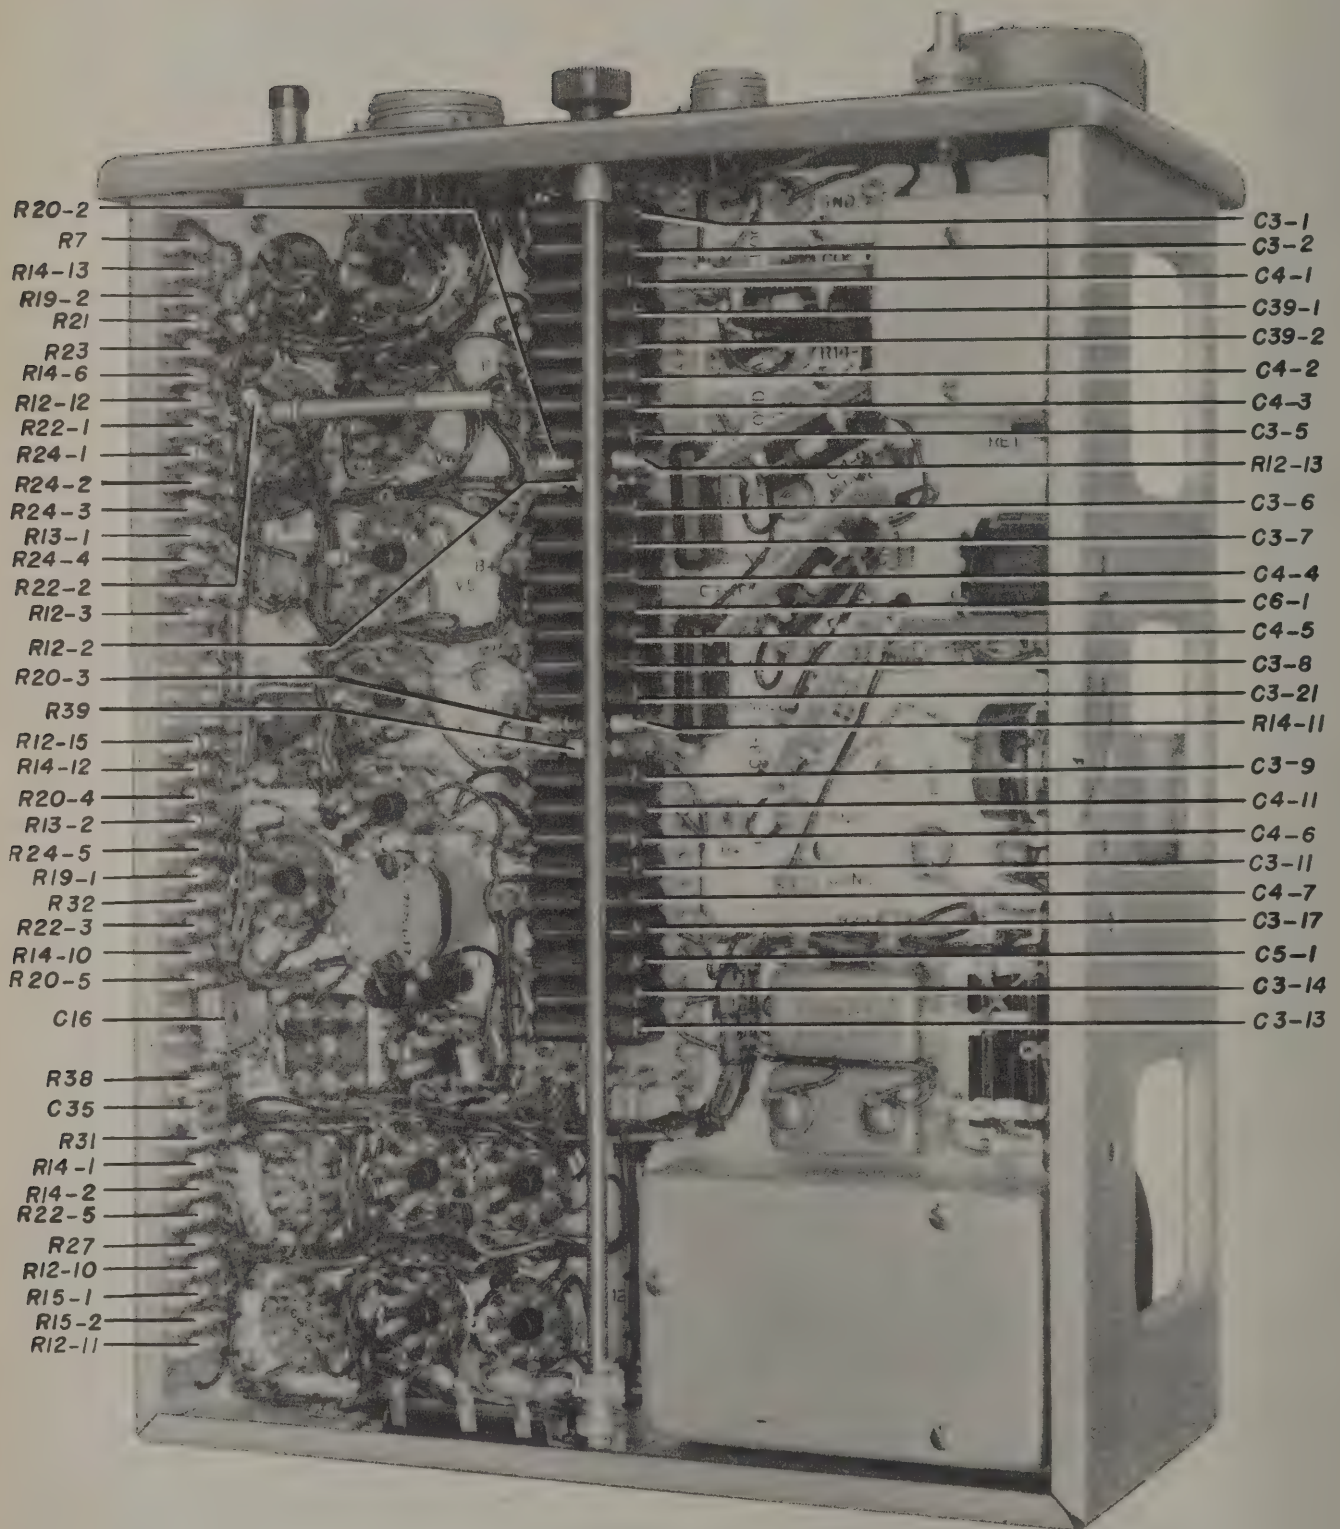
Type MN-26* Radio Compass, Right Bottom View of Chassis
